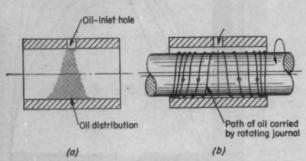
Possible oil distribution in a long bearing using only a single oil-inlet hole.
